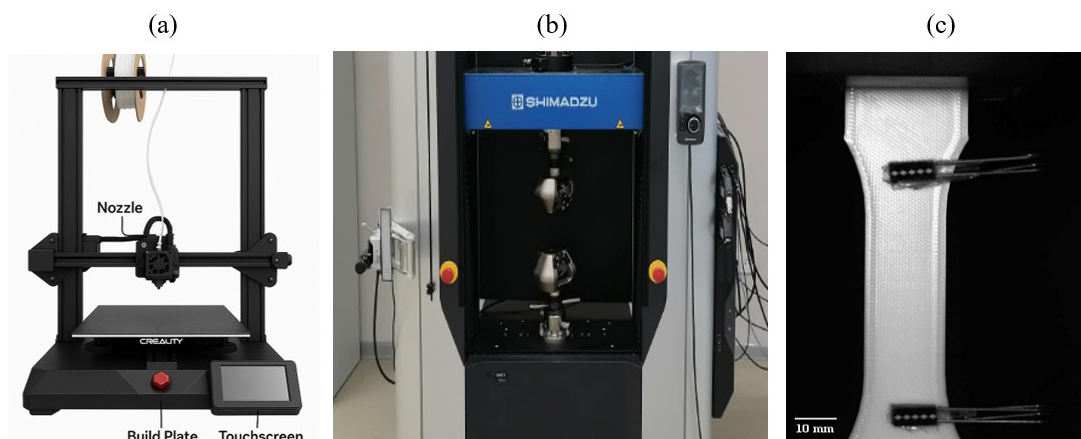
a) printer used for specimen production; b) tensile testing machine; c) tensile test of a 3D printed specimen.
